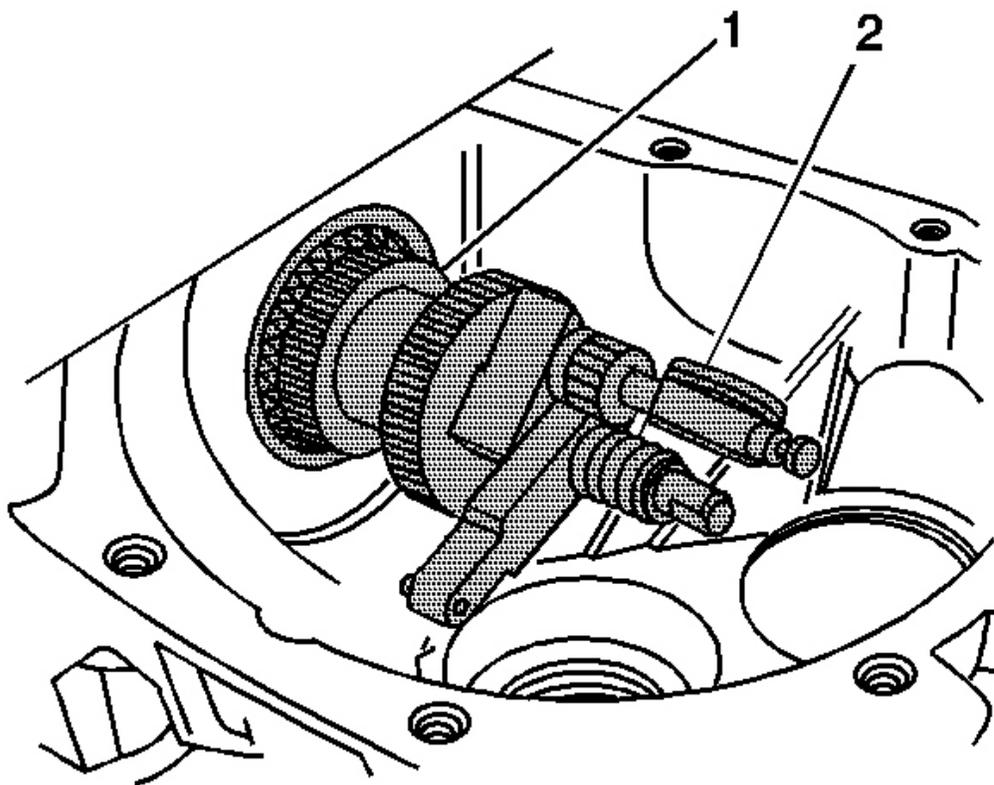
Grasping J 36601 By Flats & Moving J 36601 Out Of Differential Side Bearing Bore
